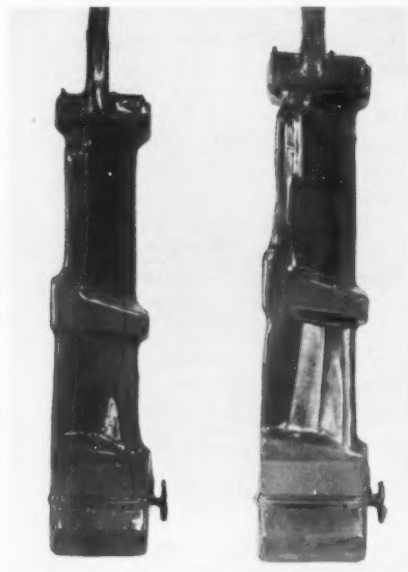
(Left) Completed coating. (Right) First cut which was processed about one hour.
